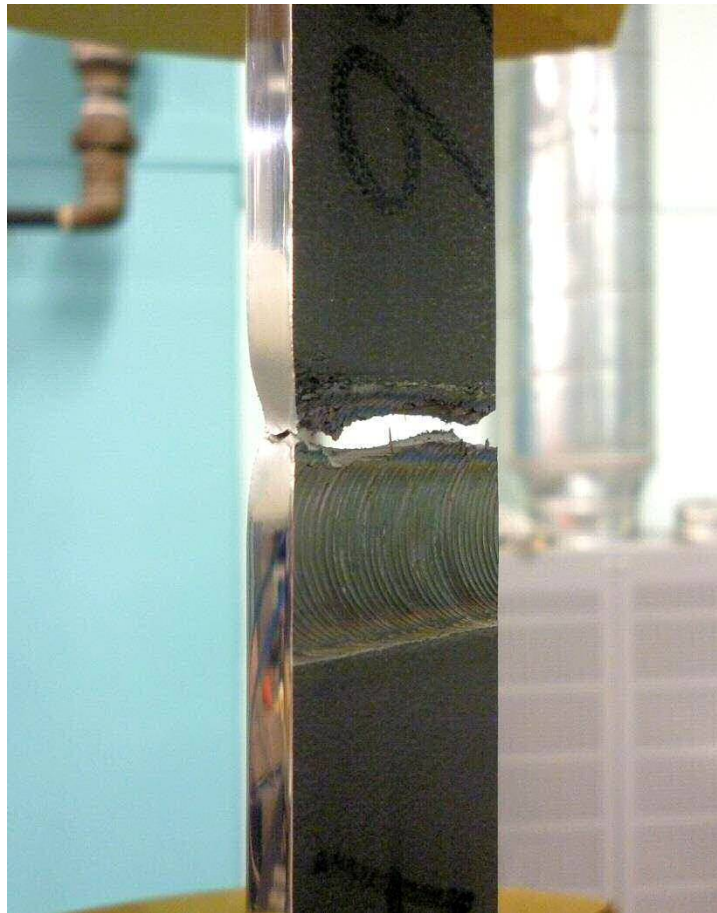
Typical fracture position of intermediate weld sample
